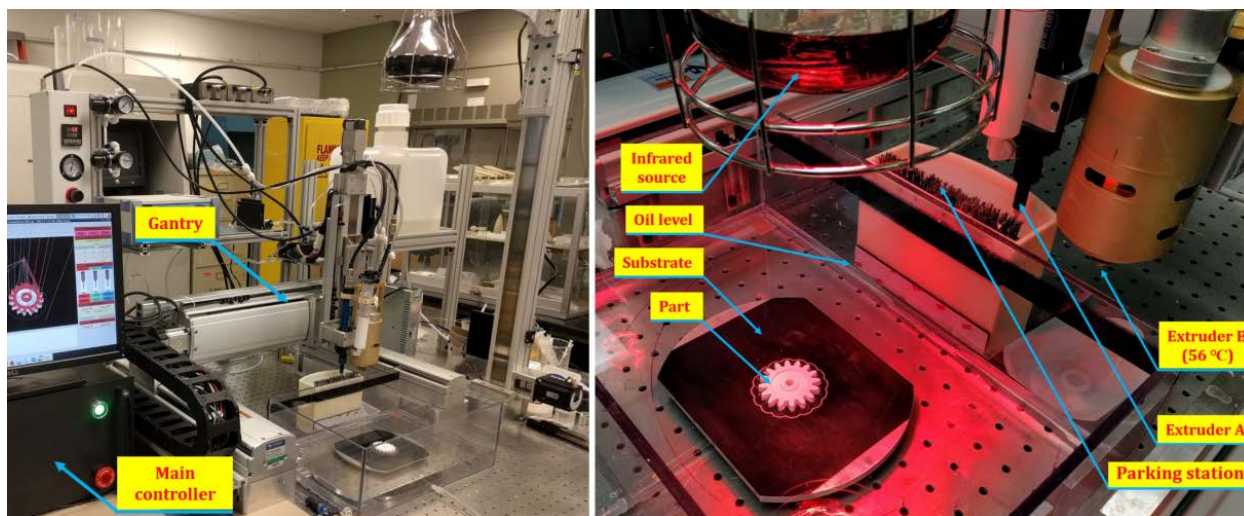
An overall view (left) and a close-up view (right) of the CODE fabrication system configured for dual-extruder printing.
